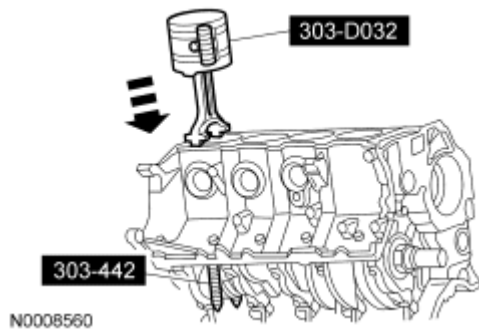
Using Special Tools To Install Piston And Connecting Rod Assembly
